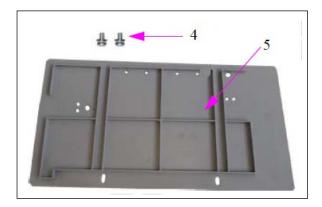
Cellular Modem Module Assembly Parts (6-9)
